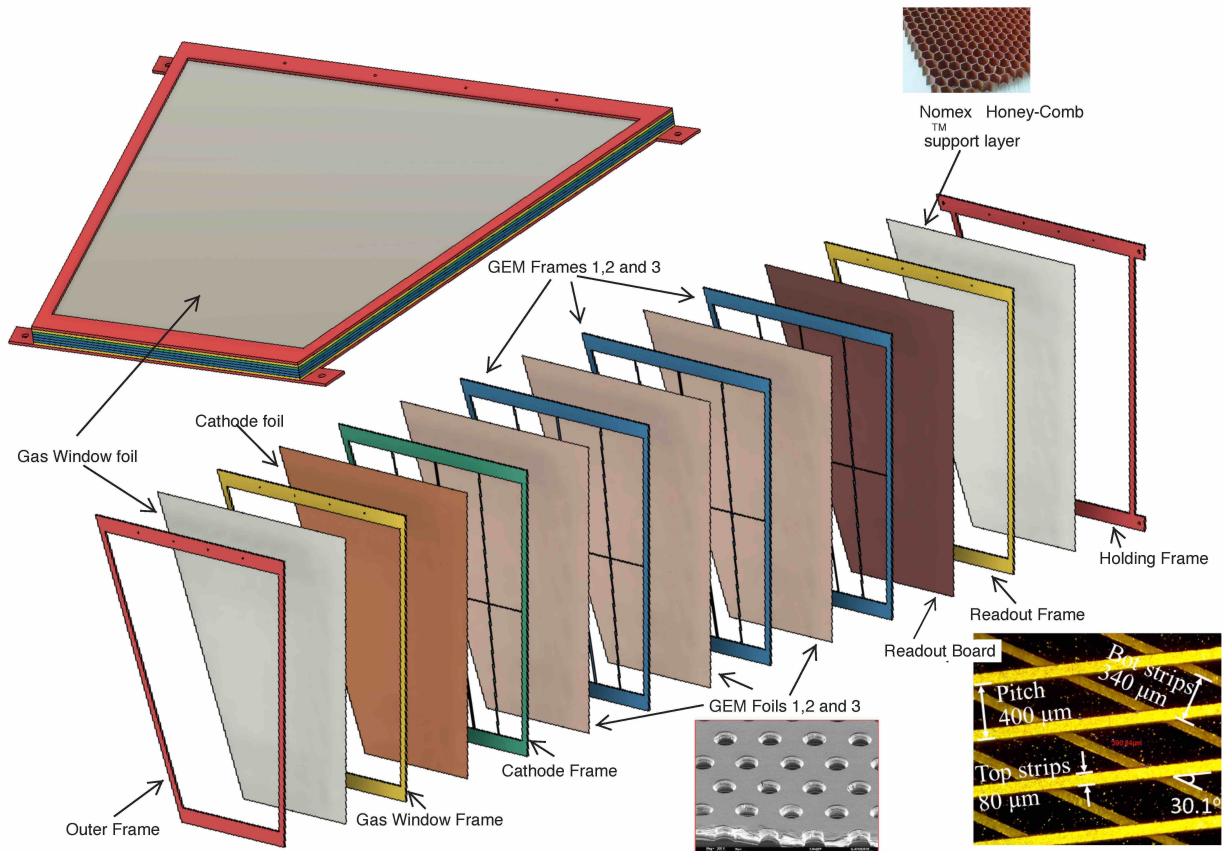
Left: The CAD design for a MOLLER GEM module. Top left shows the assembled module. Please note that these prints were made from a ready-for-production CAD model similar to the CAD designs used for many other already fabricated and operated large area GEM modules at UvA. These advanced CAD models are CNC machine ready for the GEM holding frames (which are generally produced by the Resarm corporation in Belgium for the UvA group, and photolithography ready for the GEM, cathode and readout foils, which are produced in the GEM shop at CERN). The bottom-right insert shows a high-power micro-graph of a 2-dimensional readout board similar to what would be used for MOLLER GEMs. This is an actual micro-graph taken in the UvA GEM lab clean-room of a readout board used for the UvA-EIC-GEM-II prototype GEM detector. The MOLLER GEM readout board will be very similar to this one, except for the increased strip pitch (800 μm for MOLLER, as opposed to 400 μm shown here). The position and angular resolutions obtained from the beam tests of UvA-EIC-II prototype detector with this readout are presented later in this appendix.
